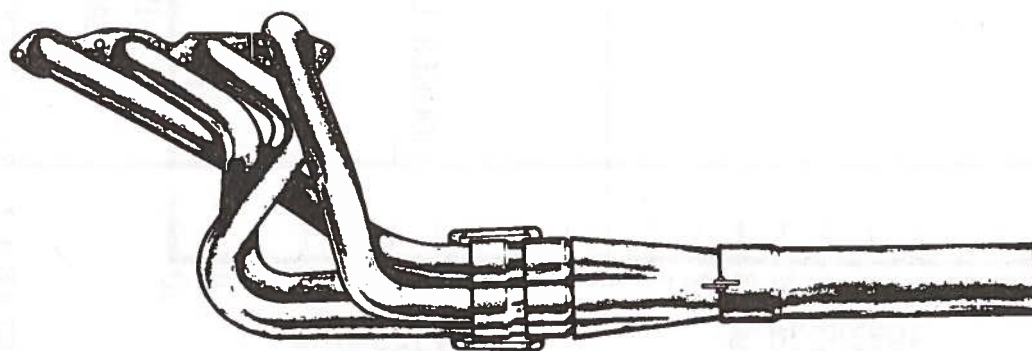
HOOKER ADJUSTABLE HEADER ASSEMBLED
